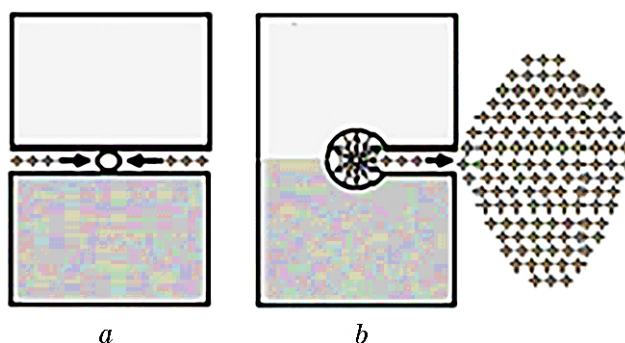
Diagram of the movement of products at the joint during welding.
